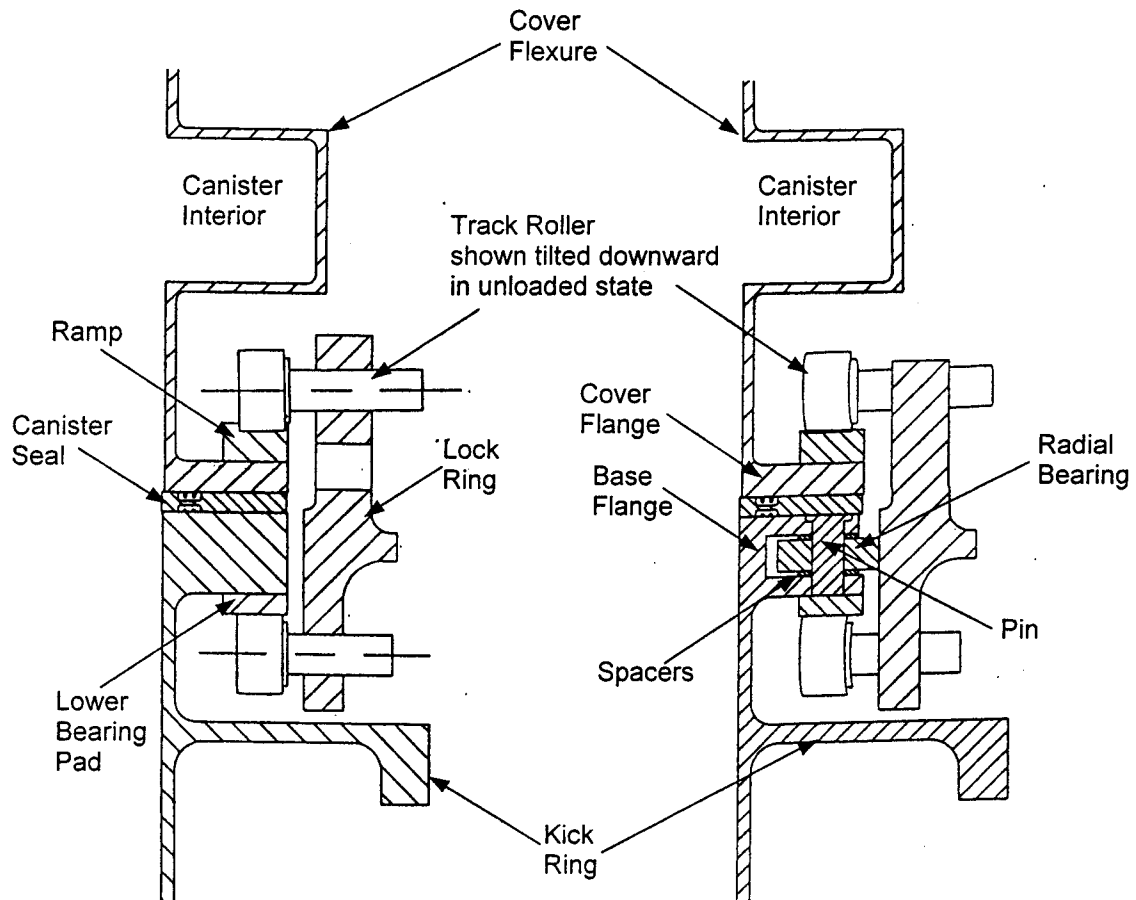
and 6b. Lock Ring Assembly sections through the track rollers in the left view and through the radial bearing in the right view
